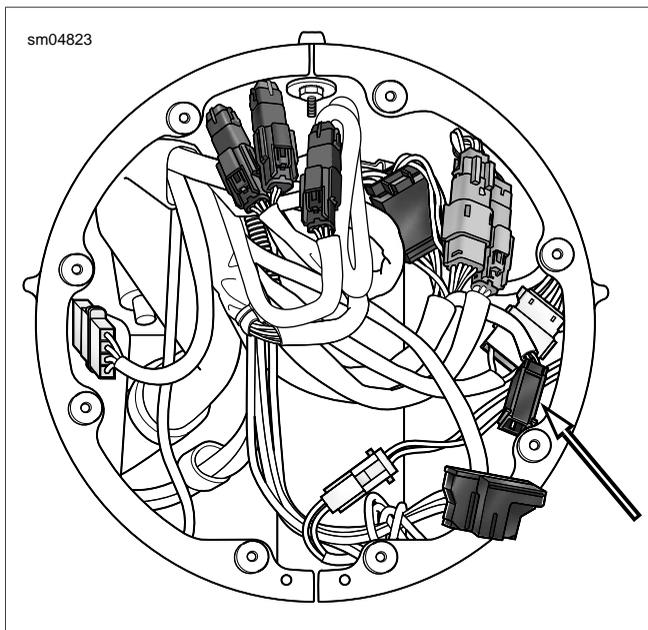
Front Fender Tip Lamp Jumper Harness Connector (FLHR/C)
